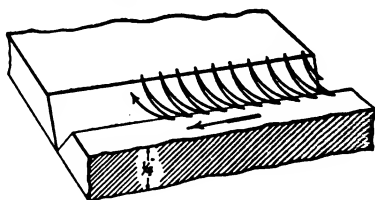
Oscillating Motion of Blowpipe for Welding Heavy Sections
